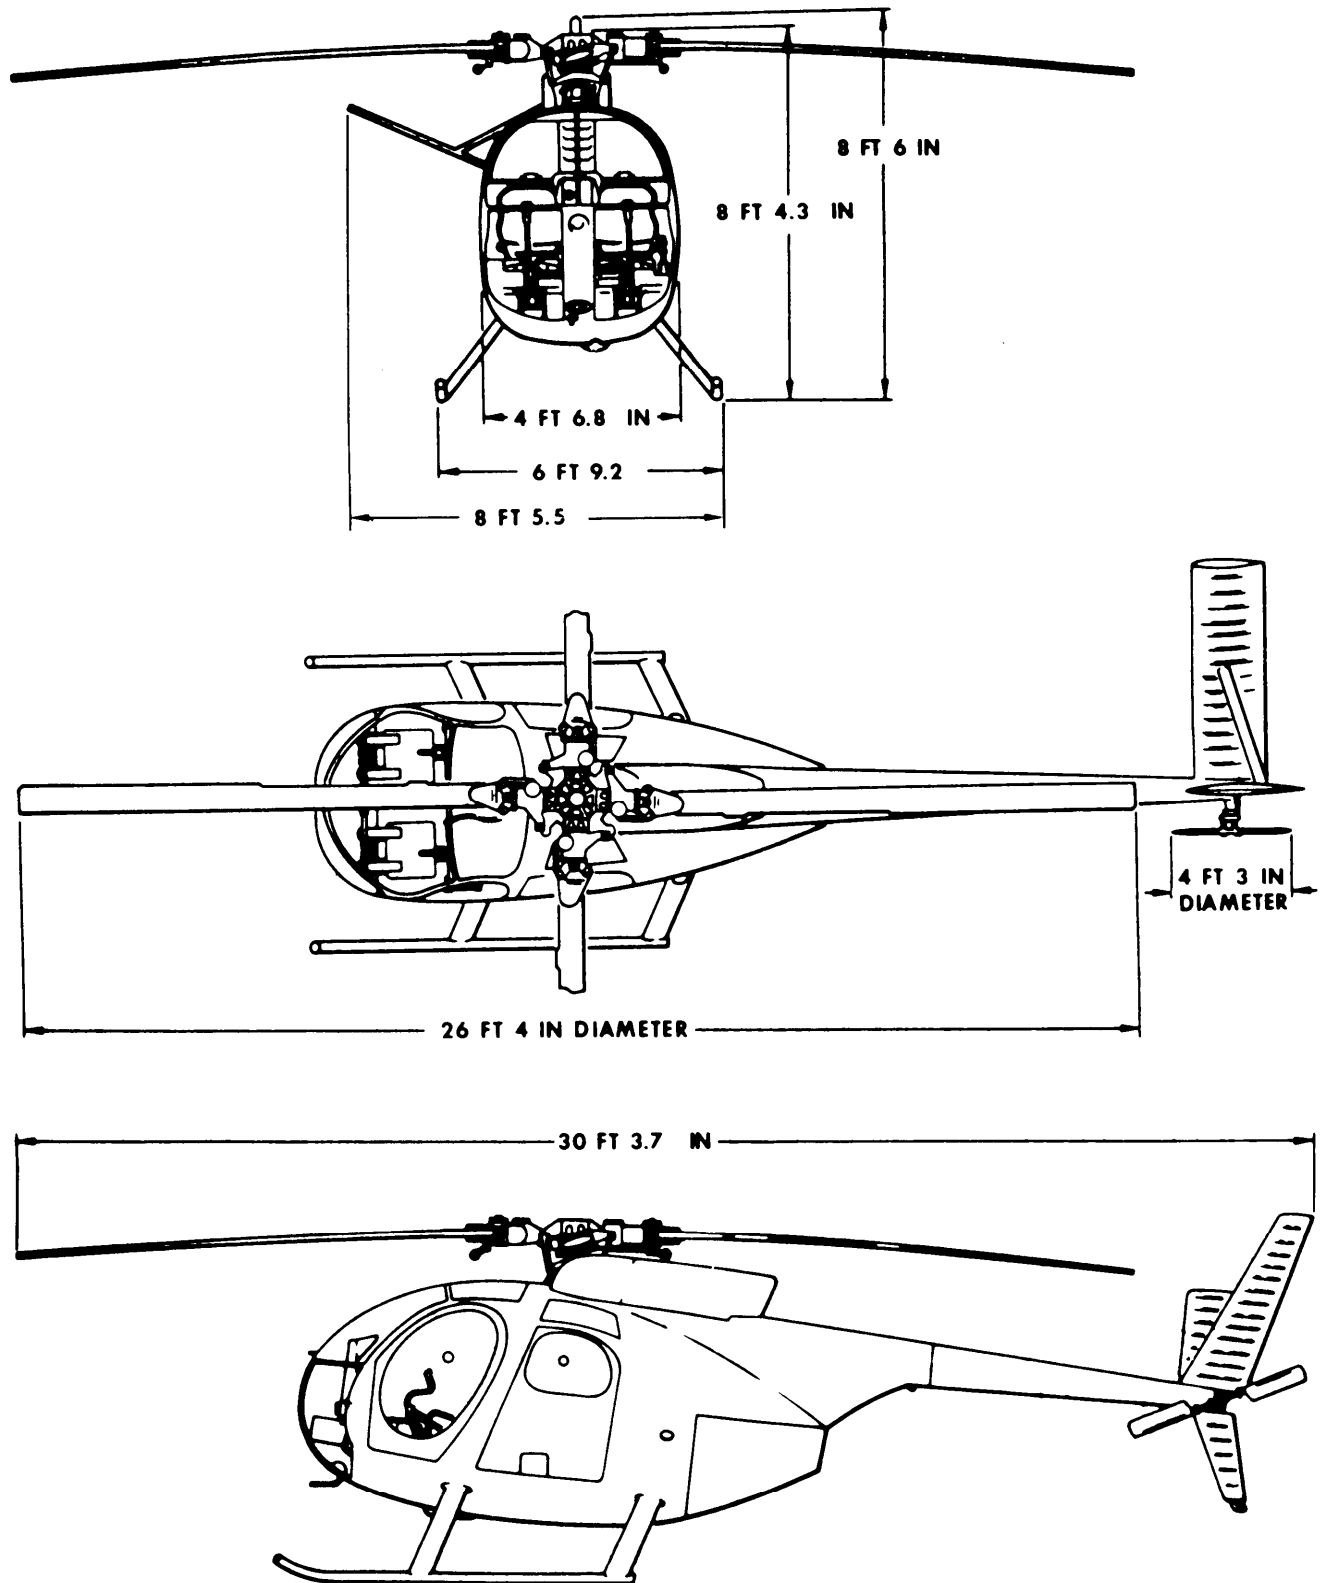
Principal dimensions, OH-6 (front, top, and side views)
